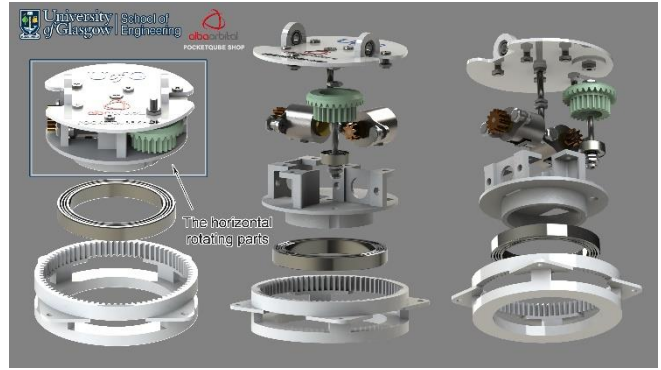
The Gimbal's Horizontal Rotating Parts and the Explosive View
